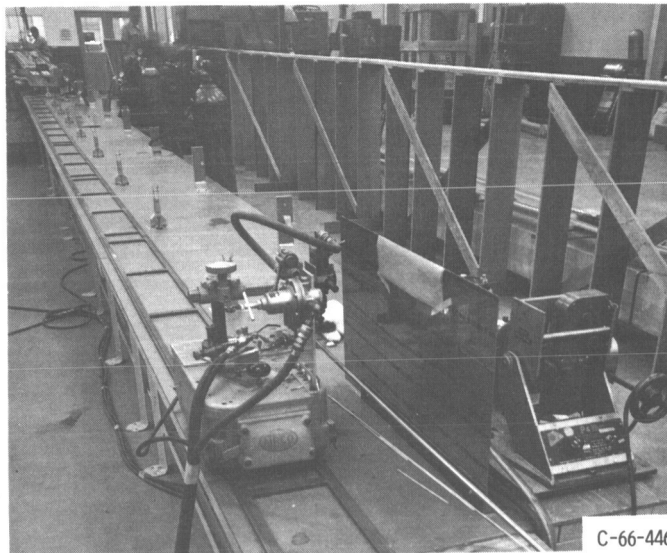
Production line for manufacture of 40-foot finned-tube assemblies.
